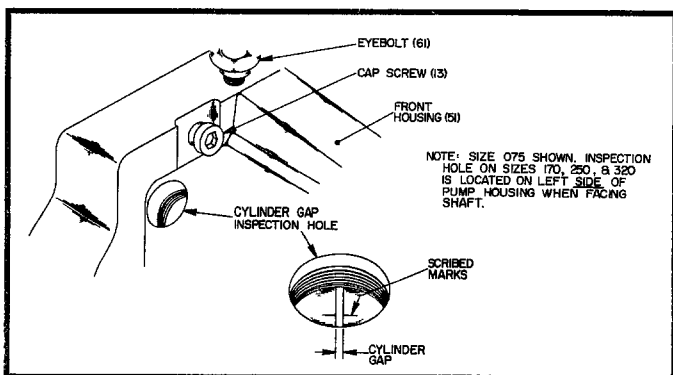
Cylinder Gap Inspection Hole (509464 sh. 2).
